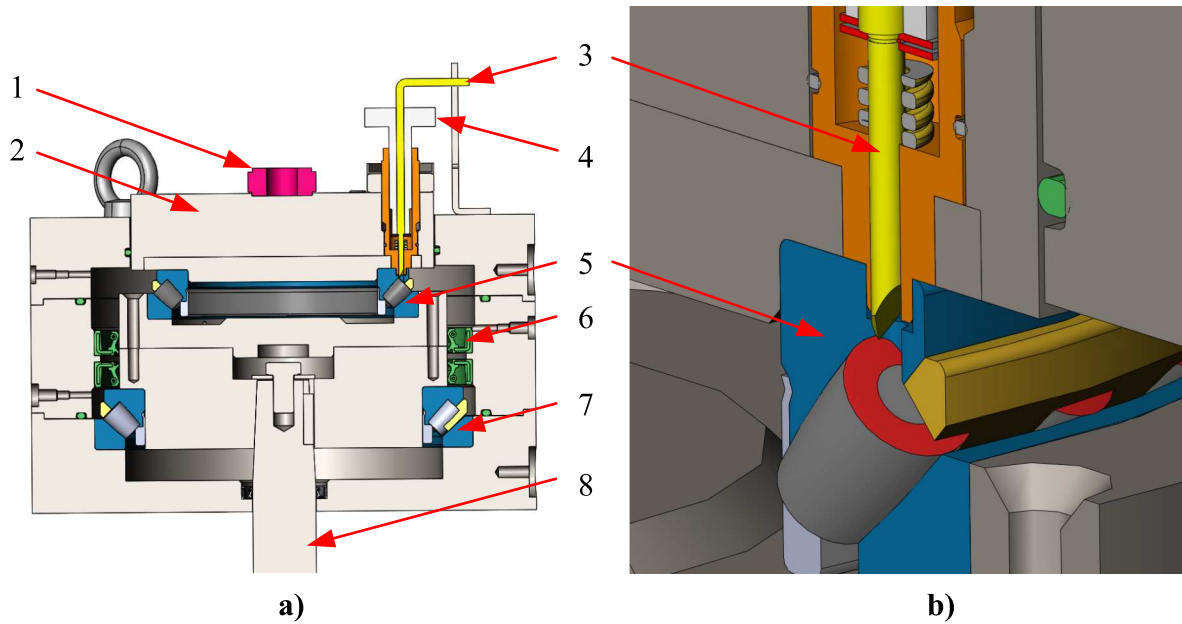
Bearing test unit. a) Test unit cross section. 1: Load cell, 2: Piston, 3: Damager needle, 4: Damager adjuster, 5: Test bearing, 6: Lip seal, 7: Load bearing, 8: Shaft. b) Roller end damager.
